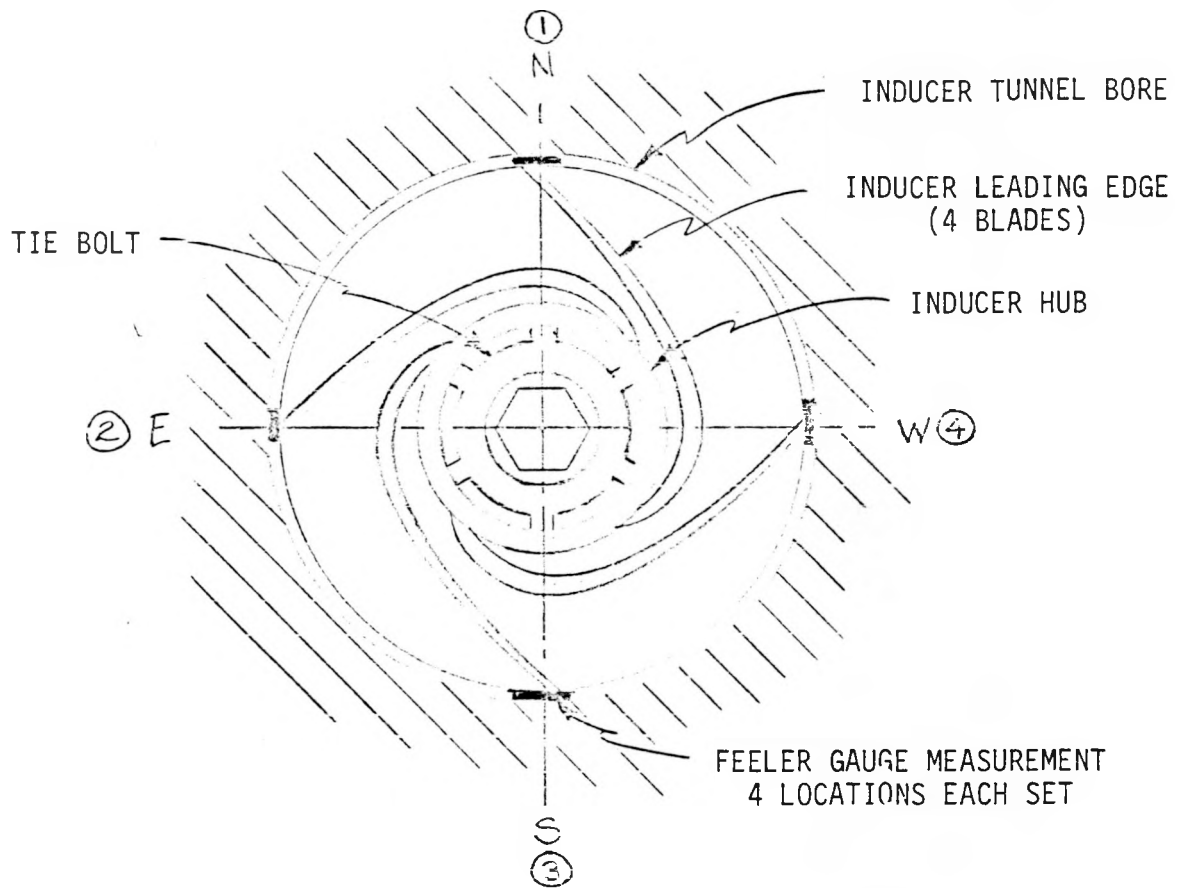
Inducer Inlet Looking UP, Showing Blade Tip Leading Edge Positions and Feeler Gauge Measurement Locations
